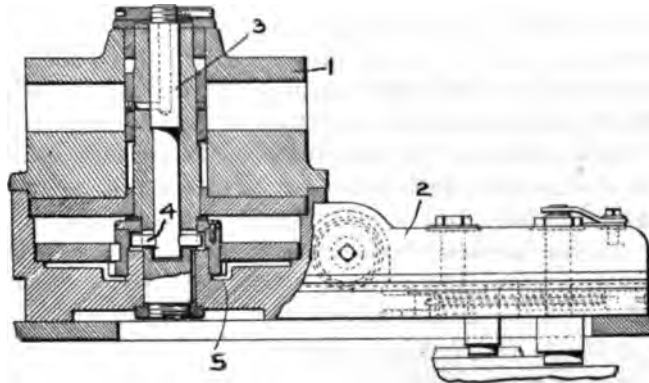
CLAMPING DEVICE FOR TURRET. POTTER & JOHNSTON MACHINE CO.
